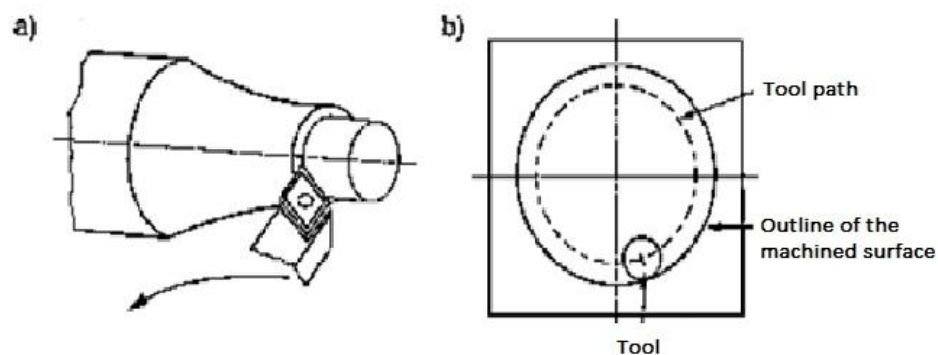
2D contour control: a) on the lathe, b) on the CNC milling machine, [9]
